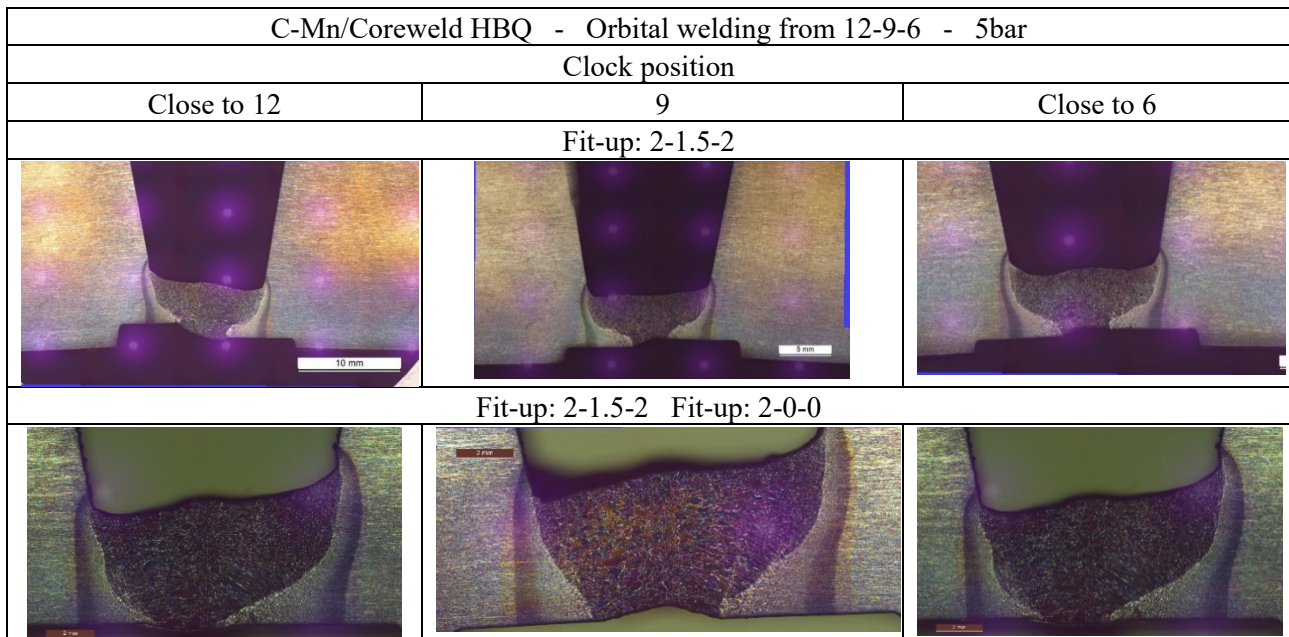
Successful orbital root pass welding from 12-9-6 positions for a fit-up of 2-1.5-2 and 2-0-0 for C-Mn (X70) welded with Coreweld HBQ at 5bar.
